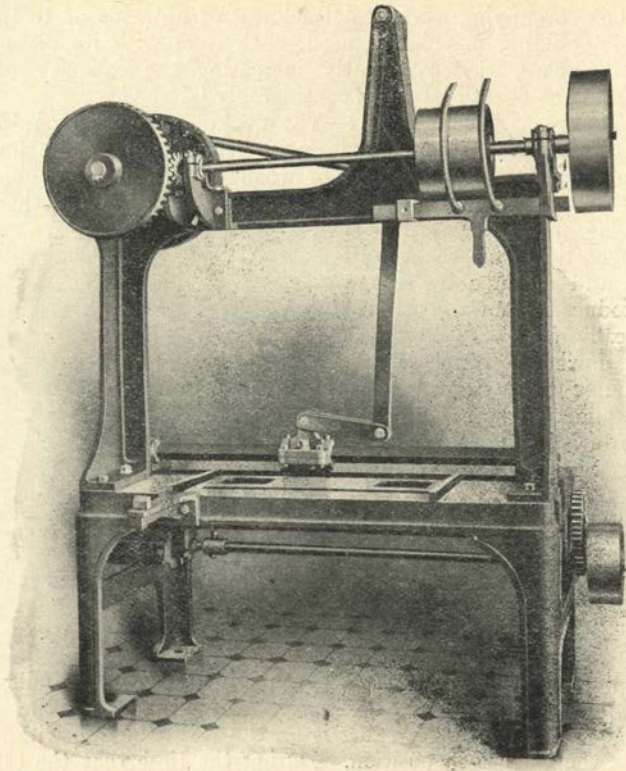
Improved Self-contained Double Cake Paring Machine.
